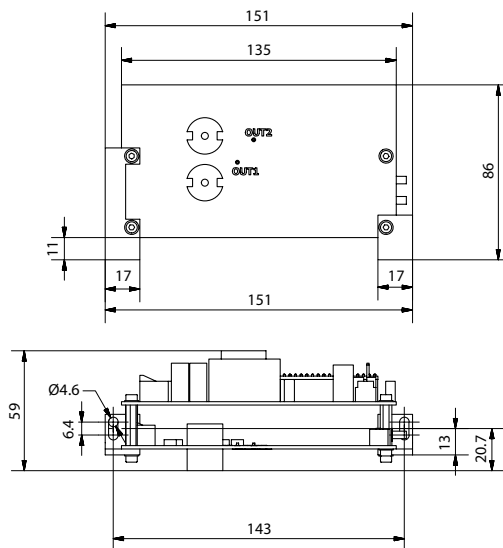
Outline drawing of OEM version DPB-3 and DPB-2.5 drivers with PS-5 power supply
